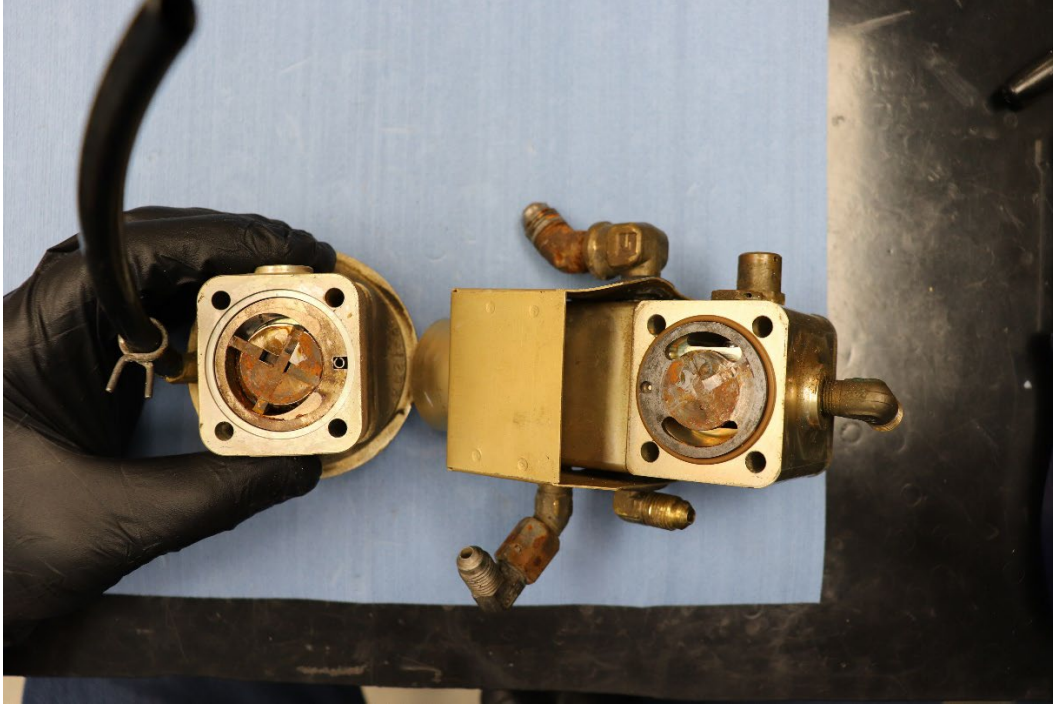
View of rust and corrosion in fuel pump (photo courtesy of the NTSB)
